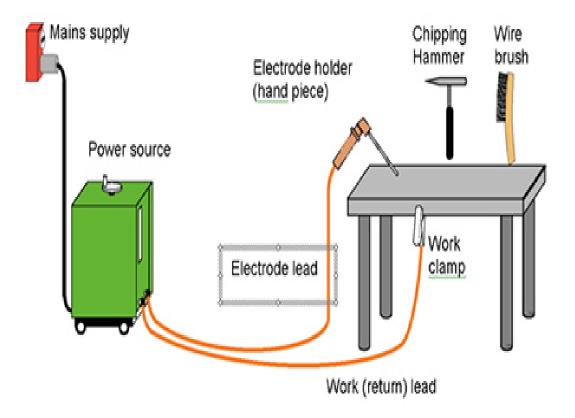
The overall view of manual arc welding equipment and tools
